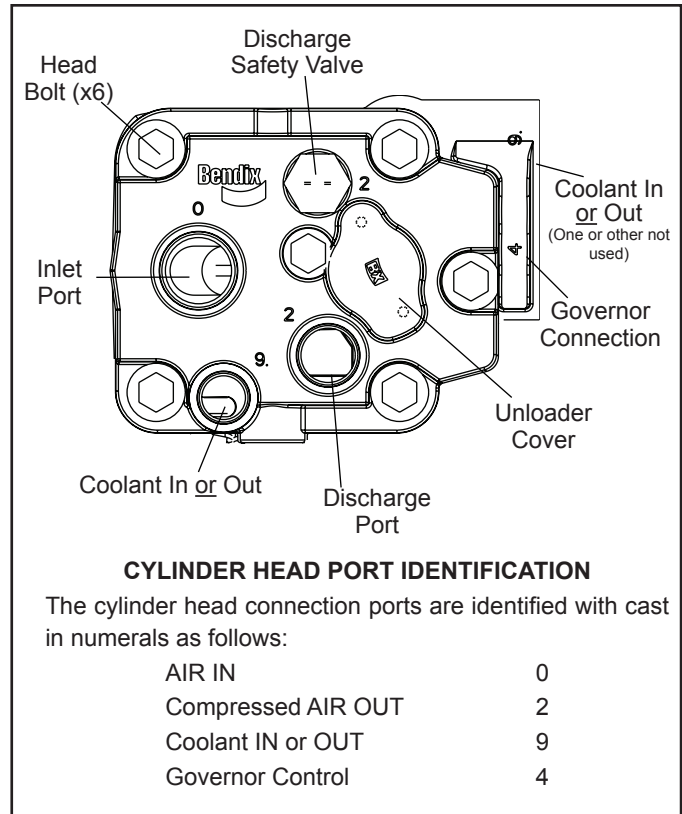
Closed Room Bendix® BA-921® Compressor Cylinder Head
